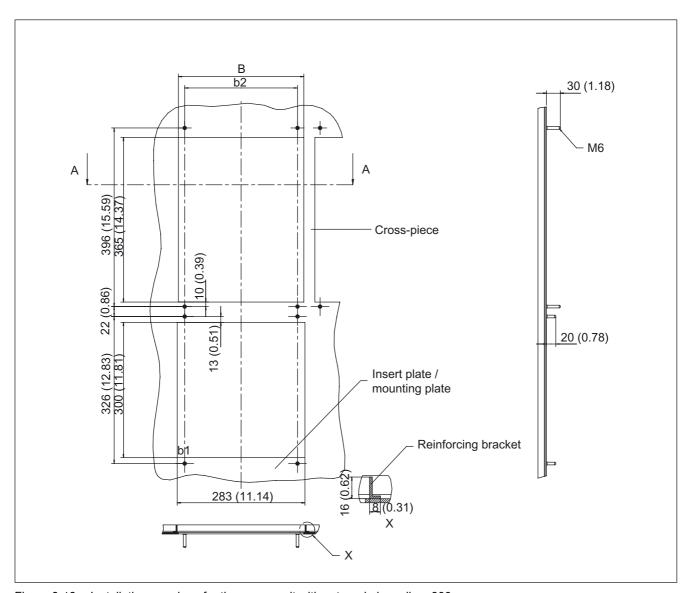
Installation openings for the power unit with external air cooling, 300 mm
